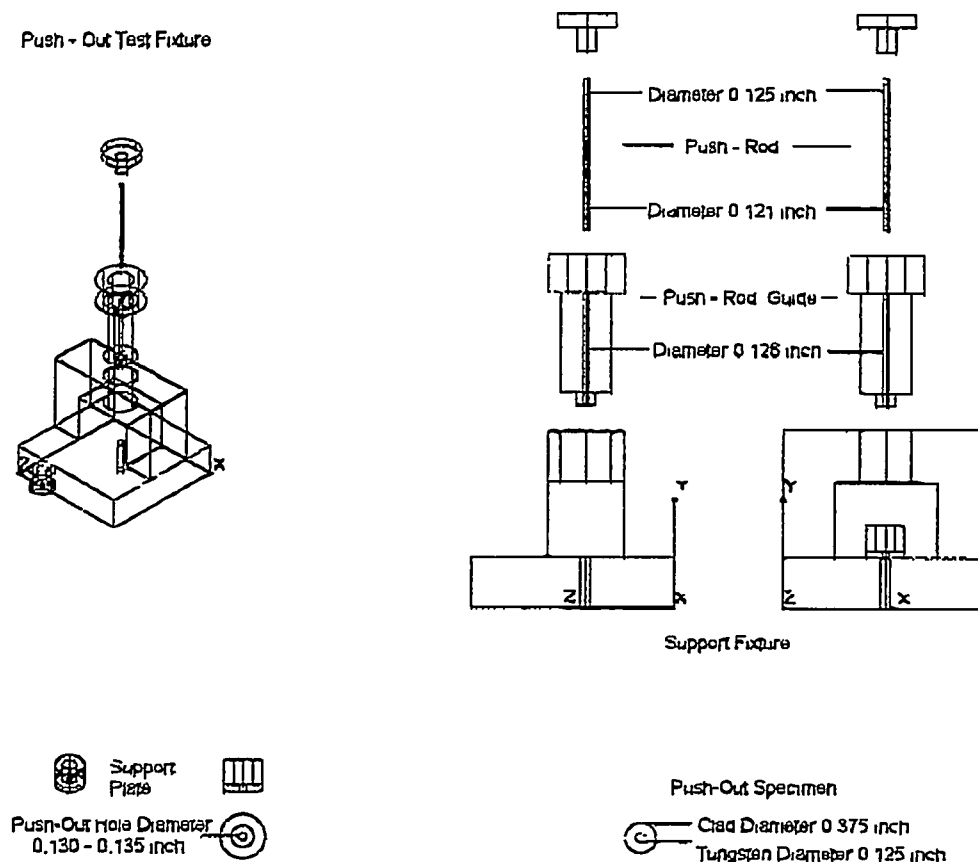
Push-Out fixture schematic and support plate used for testing tungsten-clad rods.
